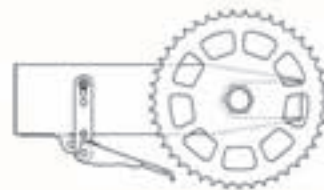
Fig. E Re-installing the lower chain guard is recommended and finishes the whole installation on the 800's, although it can be fiddly. If you have a 'hugger' fitted, you may find the spacer requirement differs from that shown. You must ensure that spacers used allow the body of the dual injector to lie in line with the chain.
